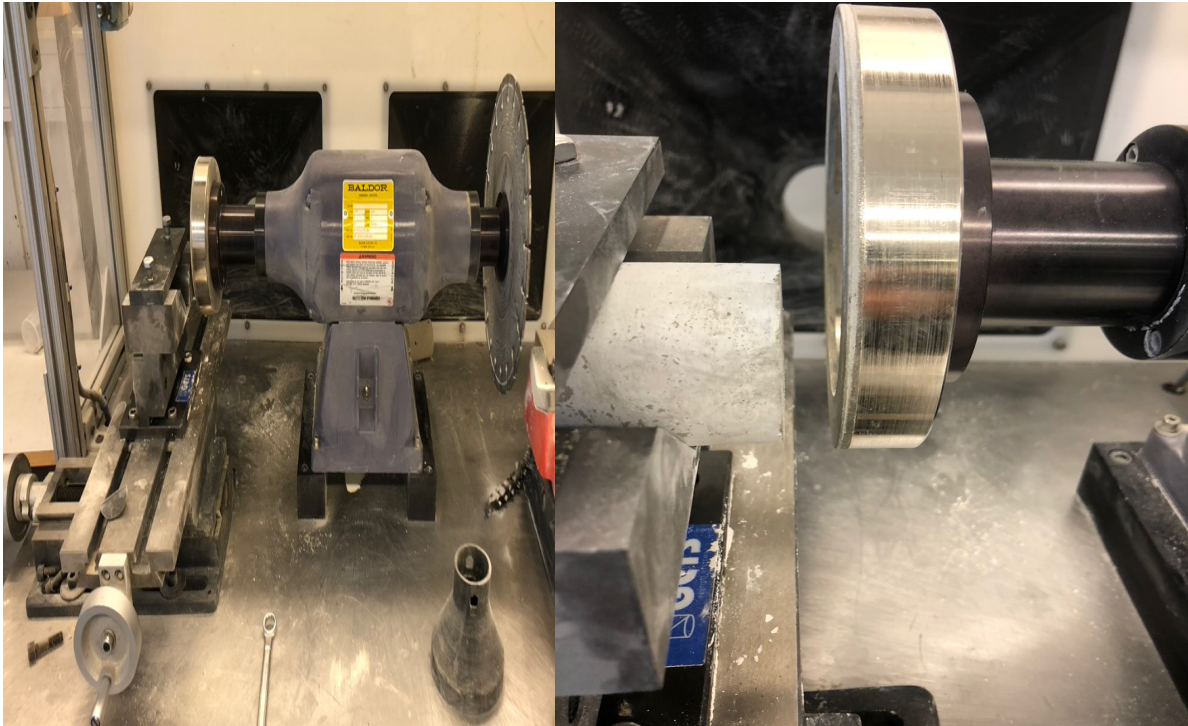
Baldor Grinder machine used to trim the cured and solidified samples.
